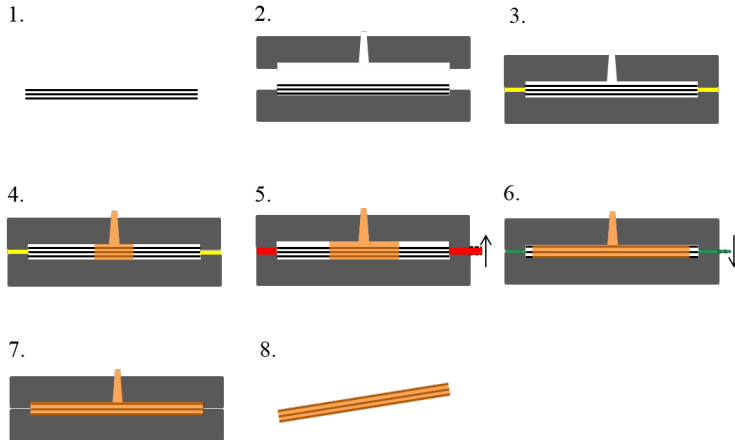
PC-RTM with 8 process steps; (1) Stacking of the preform; (2) Transfer to open mold; (3) Closing mold to initial gap height (and applying vacuum); (4) Injection with constant mold gap height; (5) Injection with opening mold and constant cavity pressure; (6) Compression with constant cavity pressure; (7) Curing; (8) Demolding [32]
